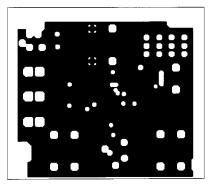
Recommended NJB PC Board Layout: Lower Inner-Layer Layout
